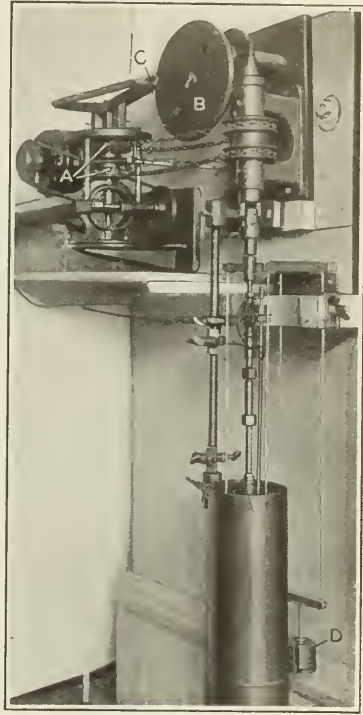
Automatic Lapping Machine for imparting High Finish to Screw Thread after it has been recut
